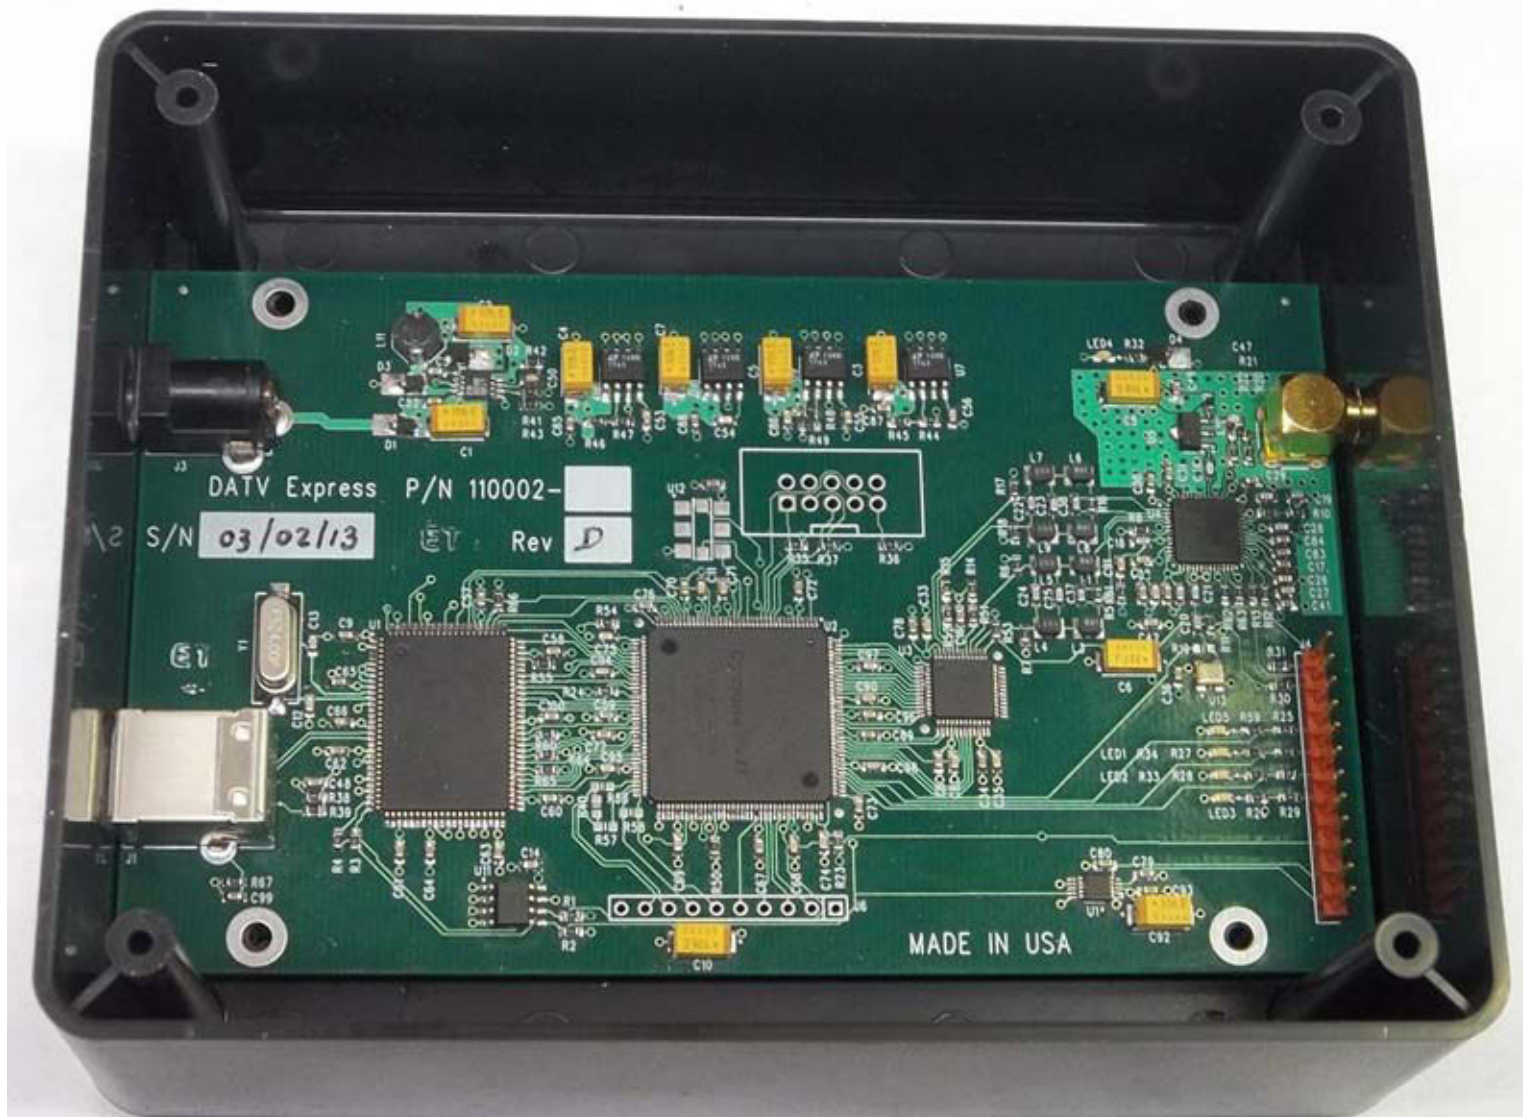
the DATV-Express exciter board is a single printed circuit board.
